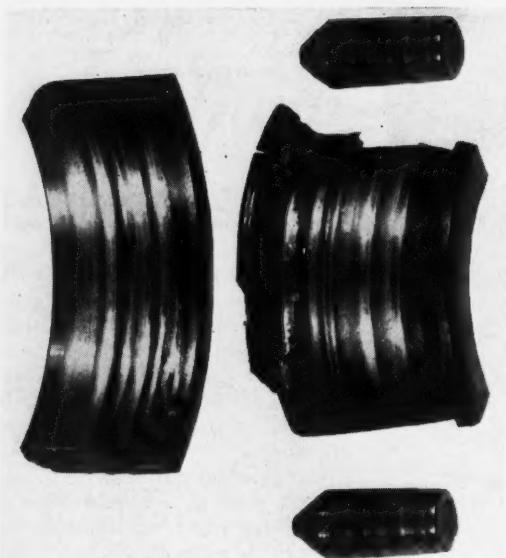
This illustration shows the failure of a taper roller bearing due to the lack of lubricant, the evidence indicating both sliding and rolling frictional wear in either, or both, the dry or boundary frictional zones.
